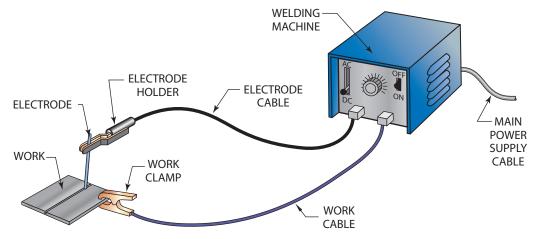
Shielded metal arc welding equipment.
